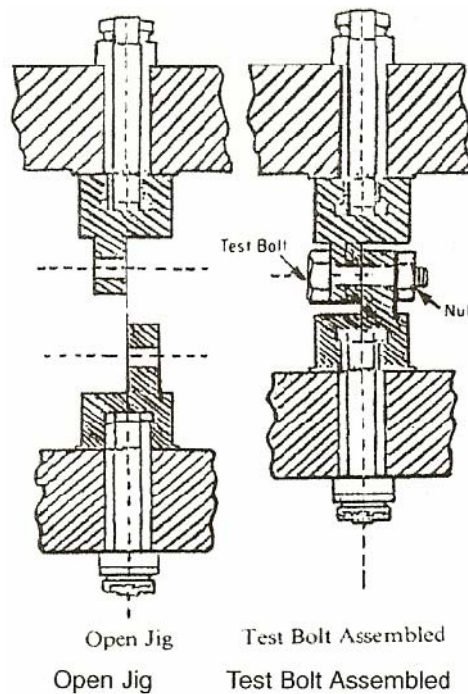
Shear Fixture Example (Tension Type) (ASTM F606-05)
